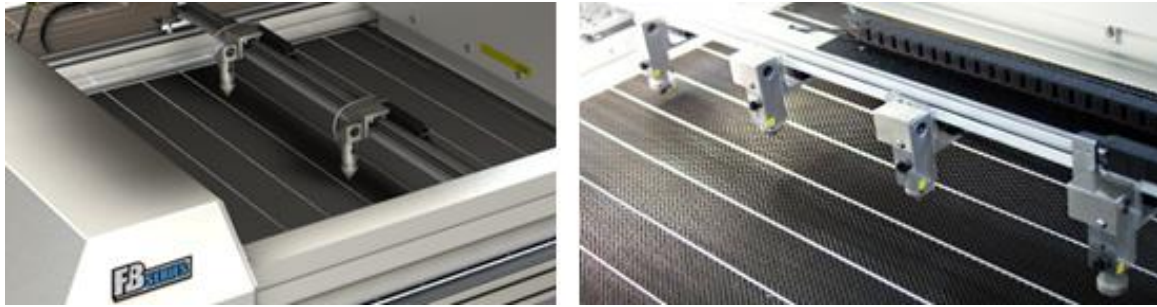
and 37 Duel and four head cutting and engraving heads (www.cct-uk.com)
